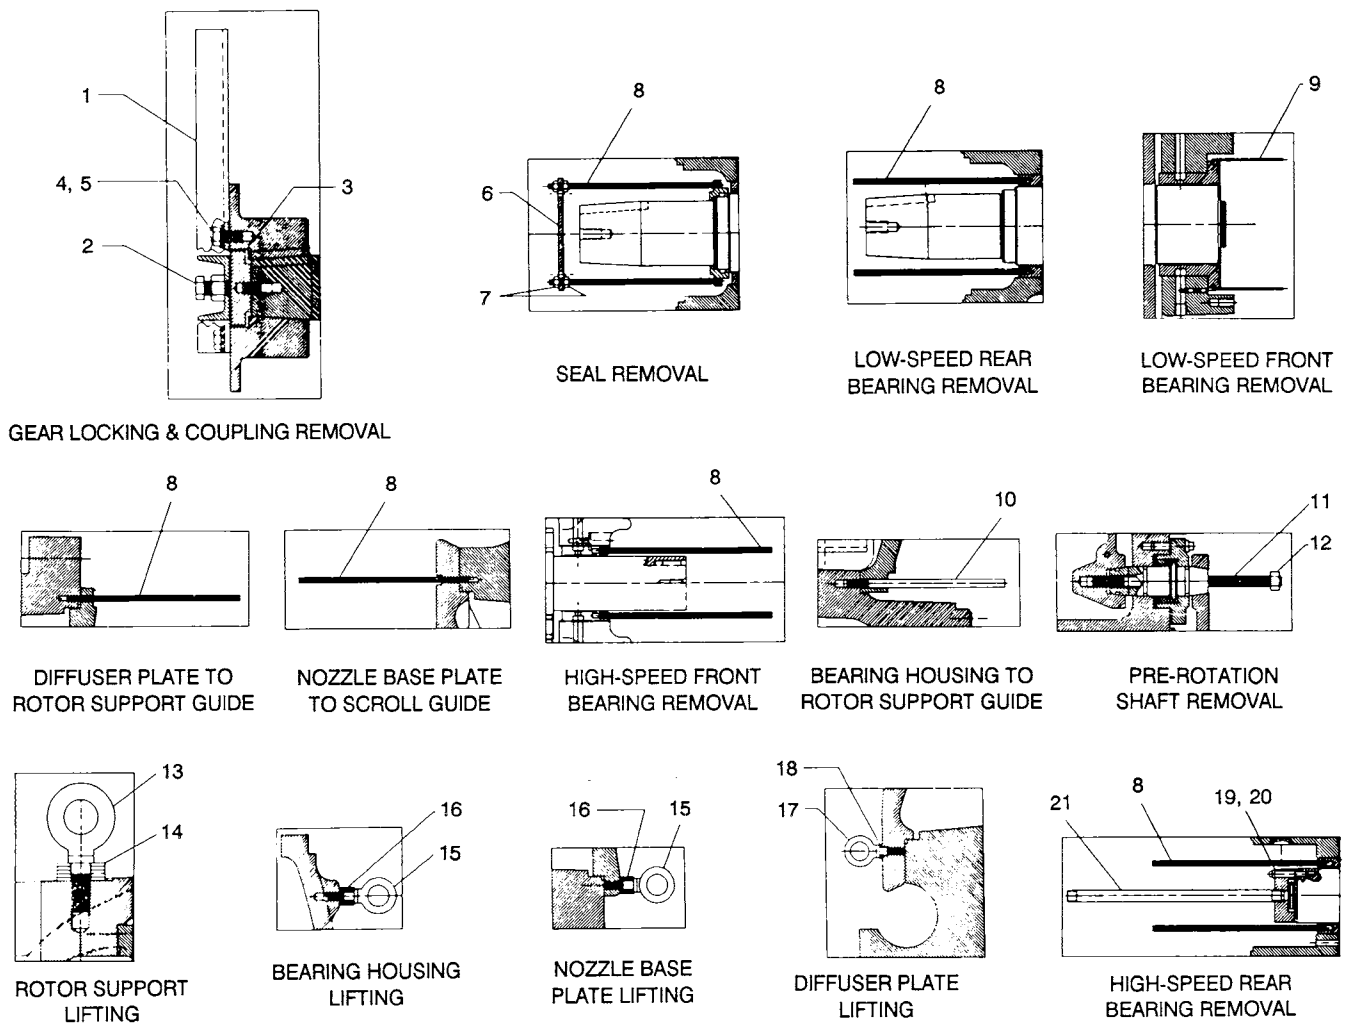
USE OF COMPRESSOR TOOLS (-39, -40, -42, -44)
